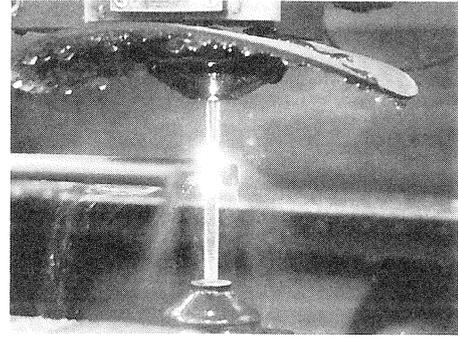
Machining of shaft by Electrical-discharge shaft machining technique
